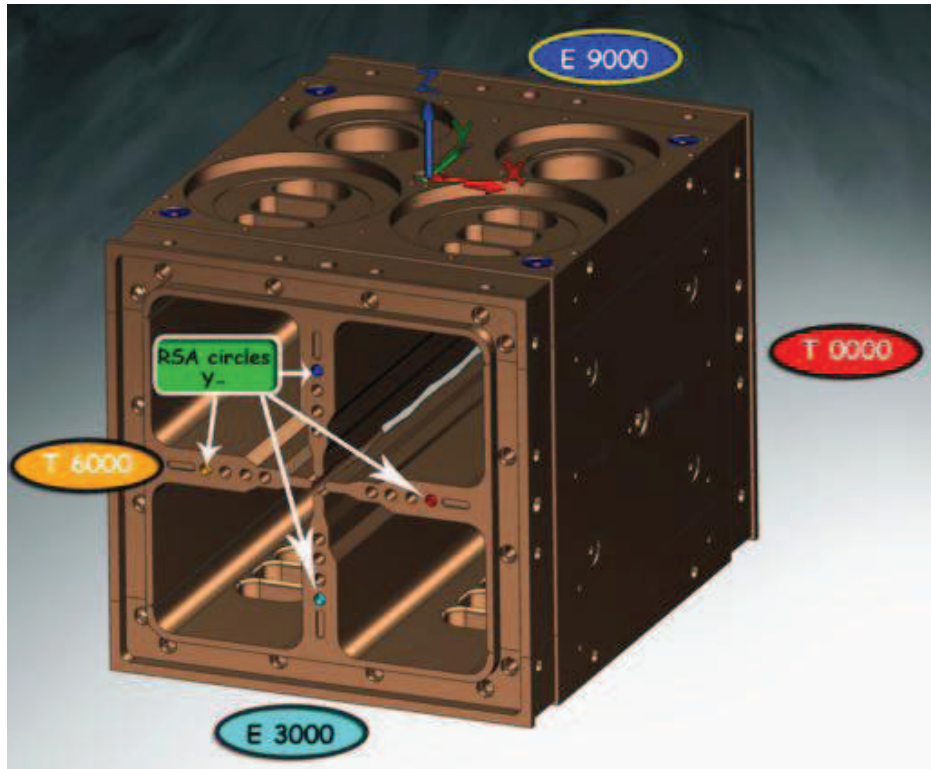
System alignment used for the CMM inspection since before the first brazing step until the fully complete module
